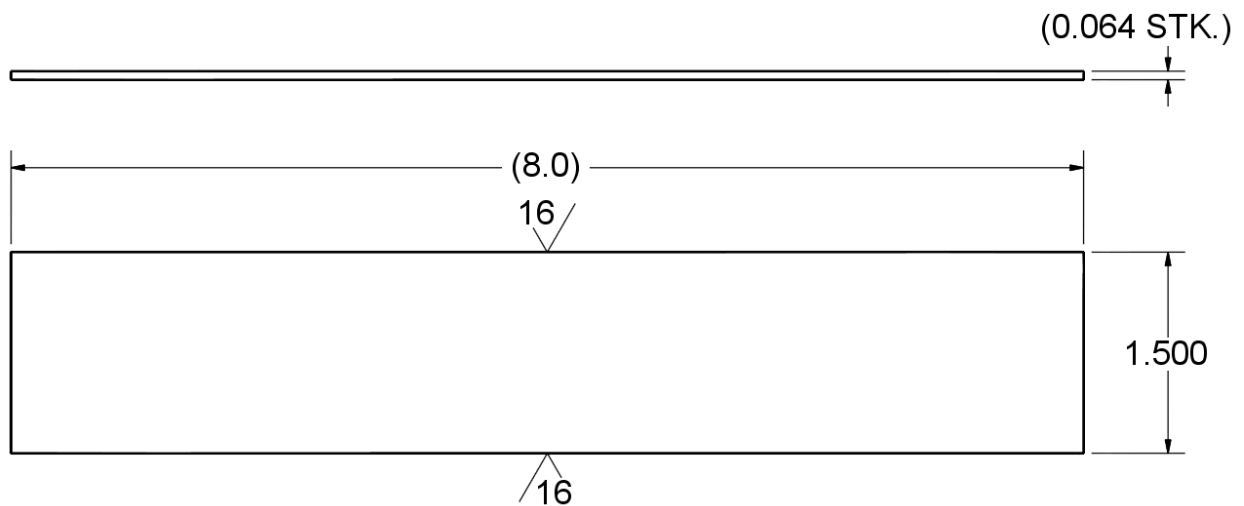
Dimensions of fatigue test coupon after machining (dimensions in inches)
